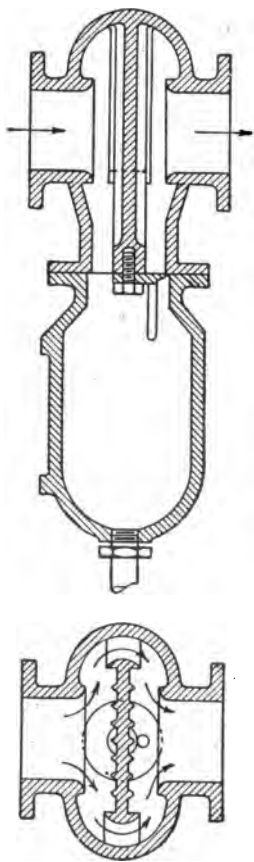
Sectional Elevation and Plan of "Cochrane" Steam Separator.
